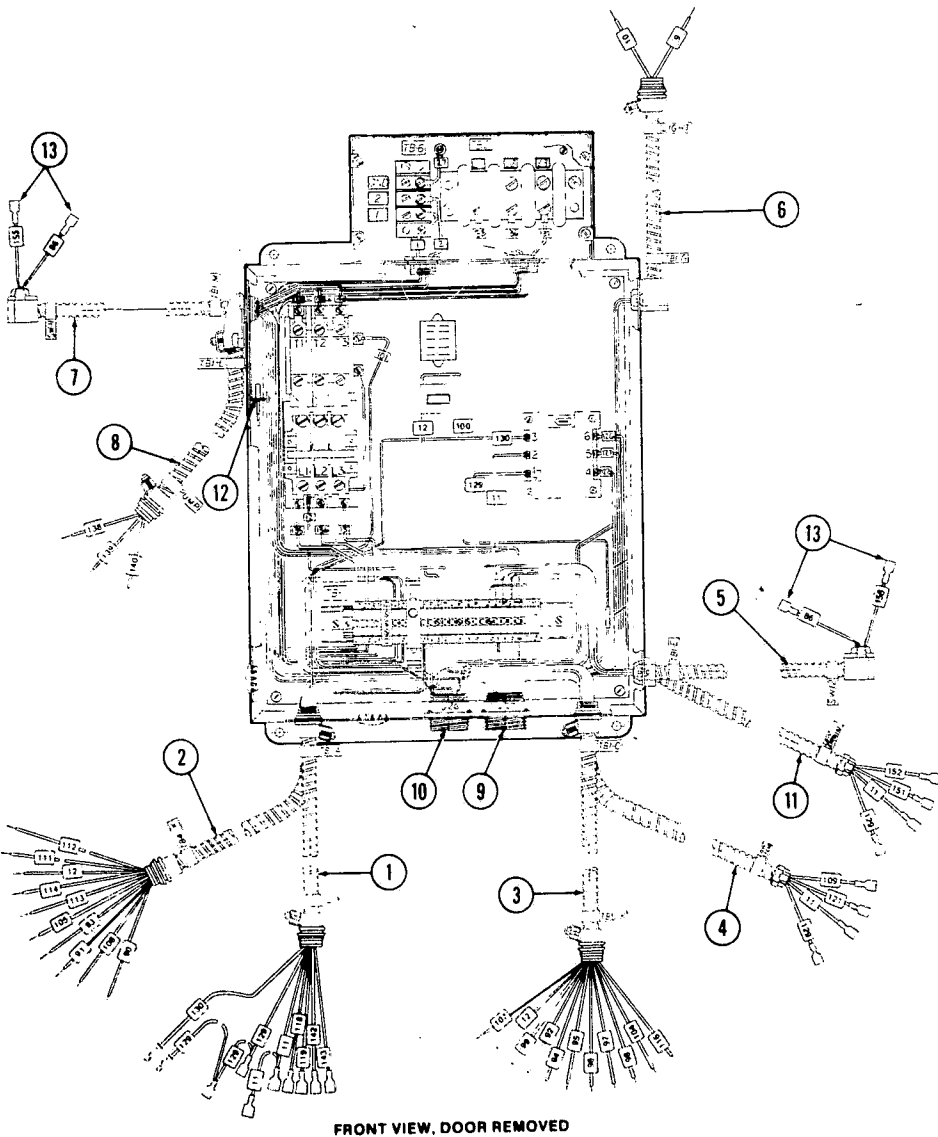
TB-1 CABLE ASSEMBLIES.
